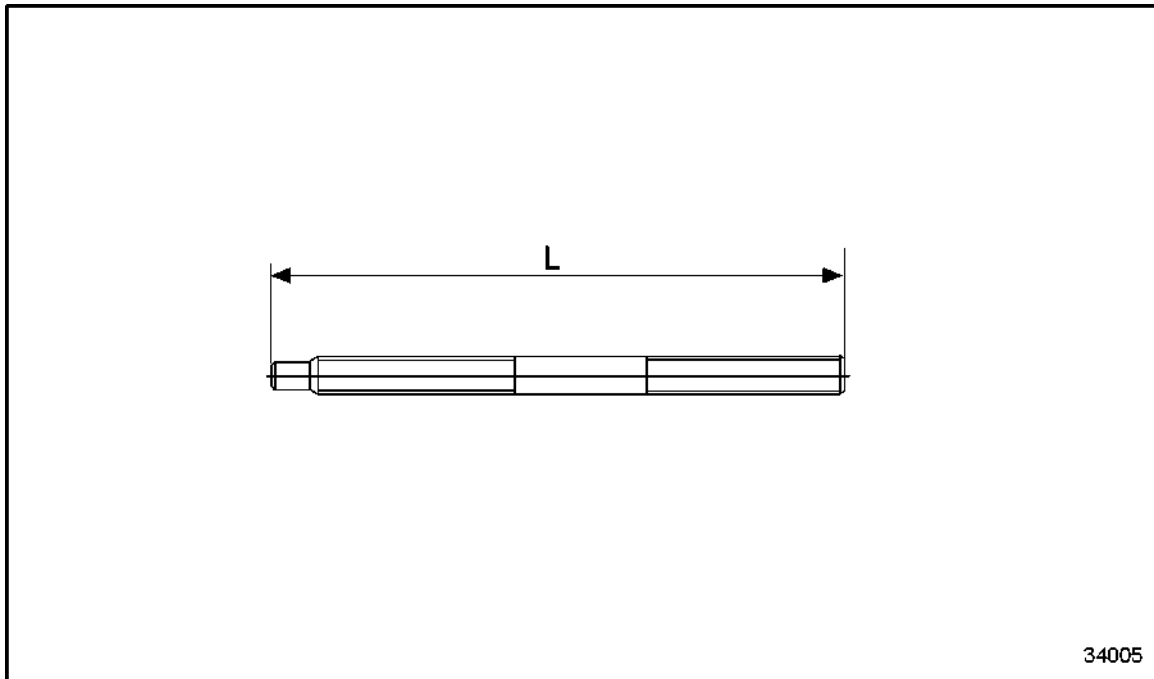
Measuring Stud for Cylinder Block Bearing Cap
